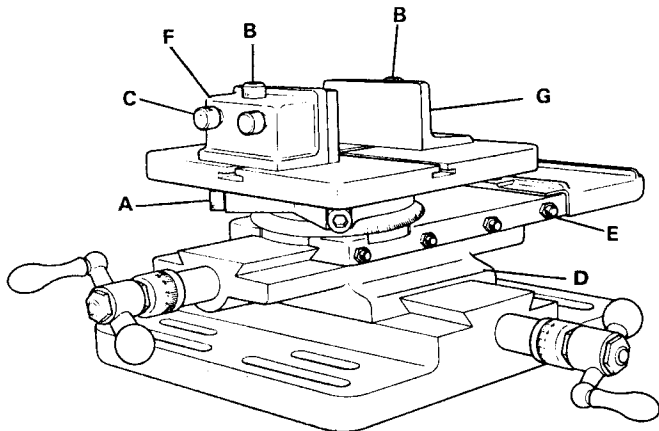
1614 UNIVERSAL COMPOUND VISE
